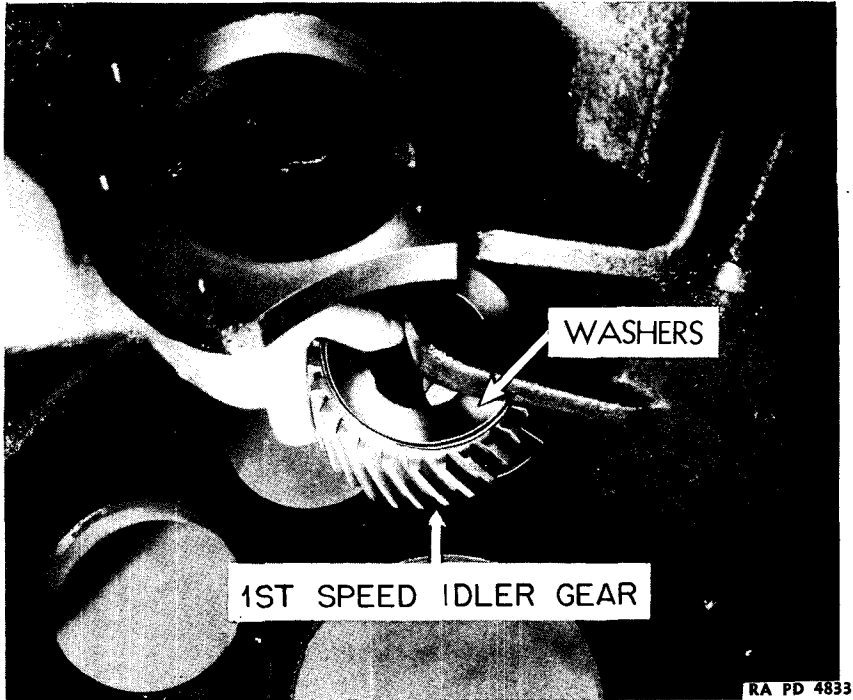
FIRST SPEED IDLER GEAR BEING REMOVED
